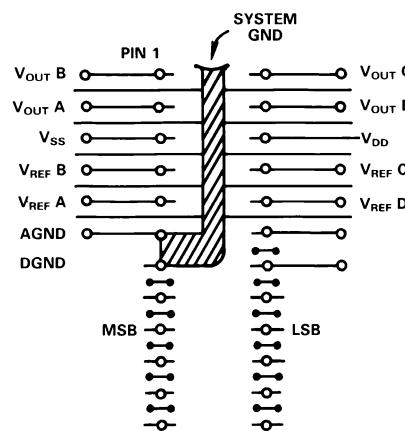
Suggested PCB Layout for AD7225. Layout Shows Component Side (Top View)
